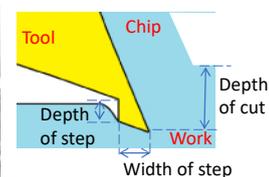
Laser cutting machine Fig.3. Definition of step tool geometry
